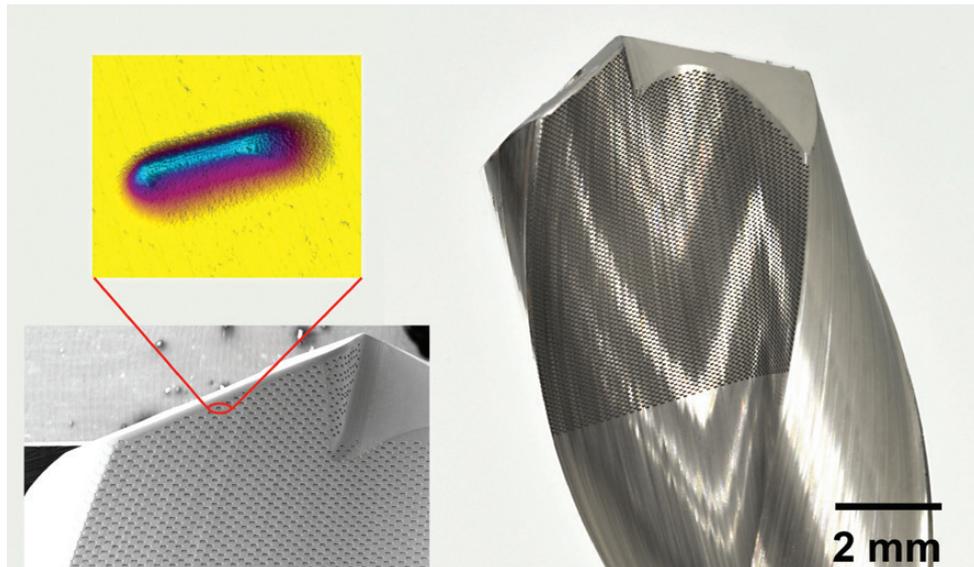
An example of a dimple texture applied to a tool: the curved flute surface of a drill is machined with a texture consisting of oblong shaped dimples with a non-symmetrical cross section. This drill was machined as demonstrator within the EU funded ADALAM project.
